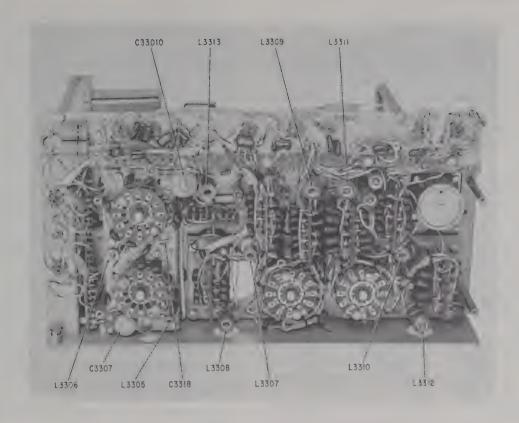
21. Channelizer Subassembly, End Cover Removed,
